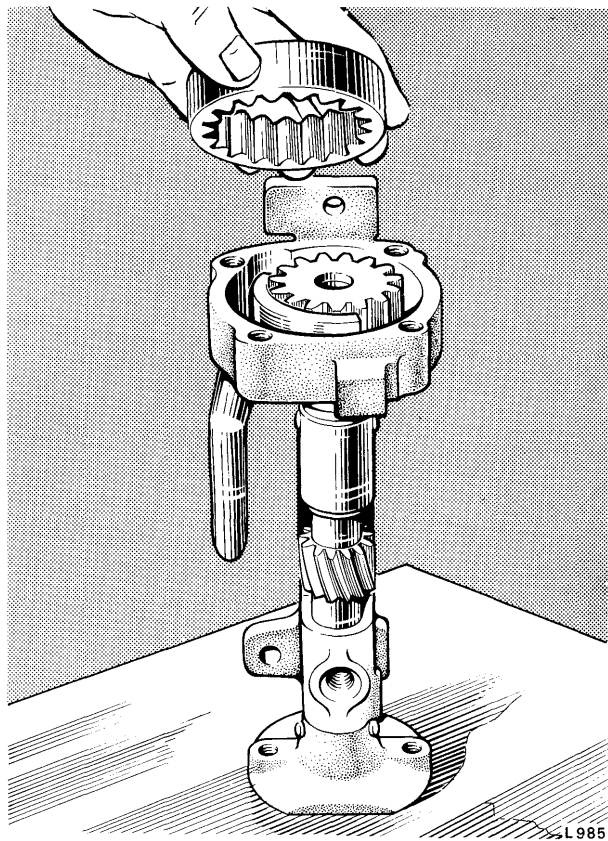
FITTING THE OIL PUMP ANNULAR GEAR
